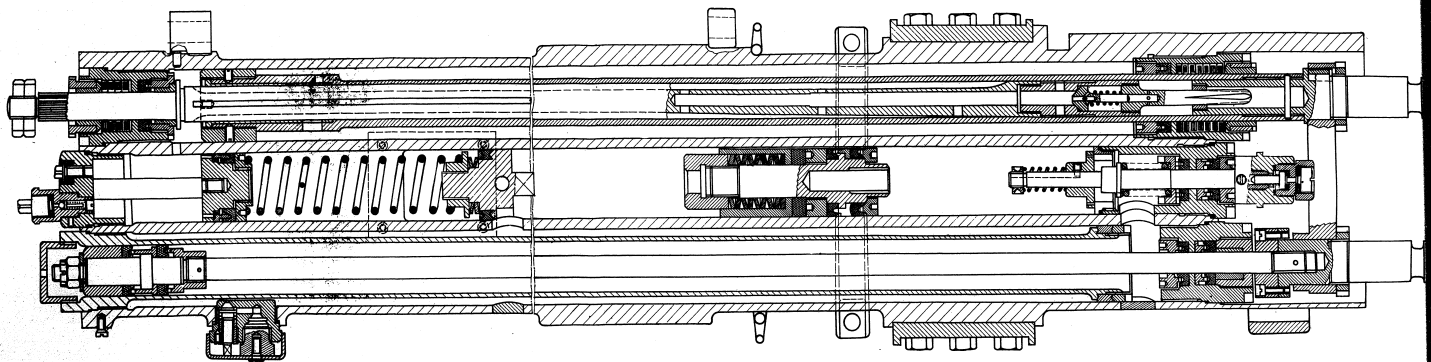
HYDRAULIC RECOIL BRAKE AND RECUPERATOR ASSEMBLY
